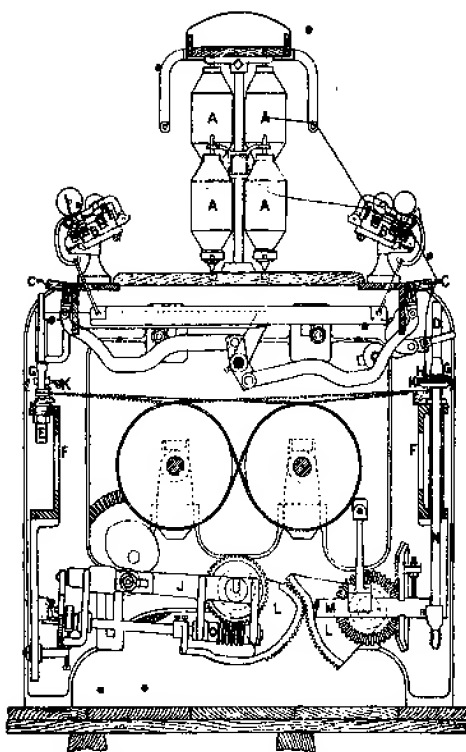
SECTION THROUGH RING SPINNING FRAME,
